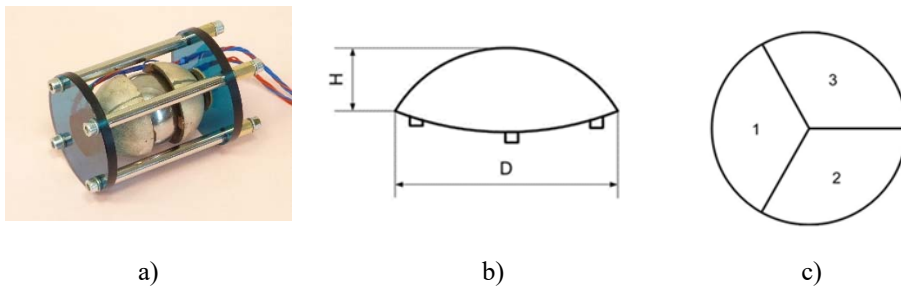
Cylindrical type actuator: a) the analyzed kinematic pair;
